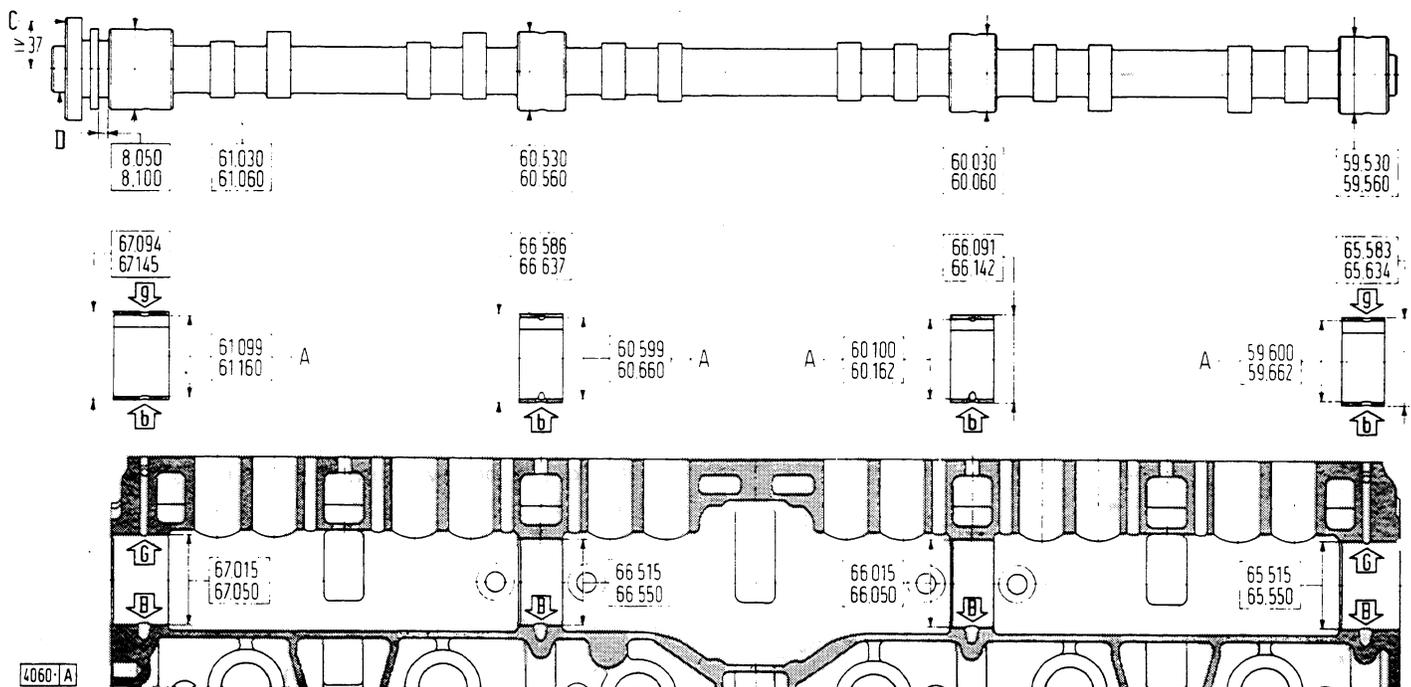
Camshaft, Bearing and Housing Dimensions
